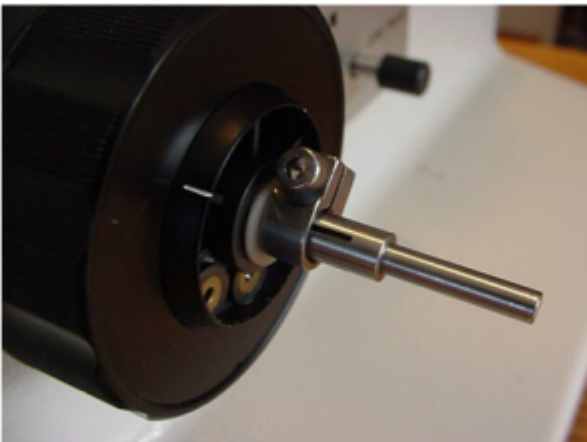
Install 1st drive shaft on to microscope's fine focus shaft
